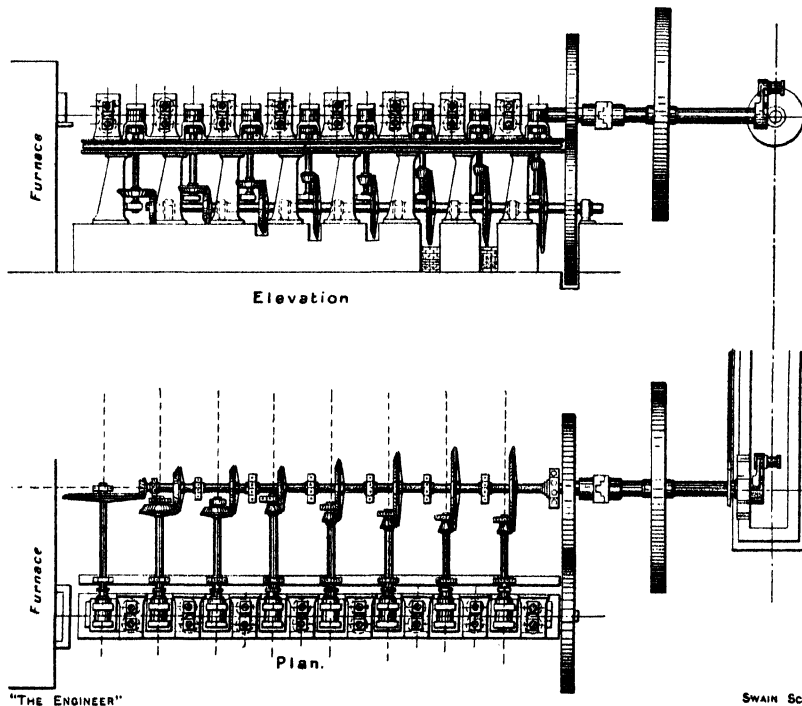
THE FIRST CONTINUOUS WIRE ROD MILL.
